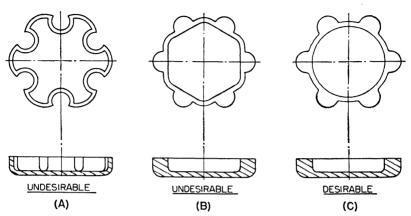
Complex contours add to die cost and make necessary more expensive cleaning tools. Since the dies for part C would be simpler and could be made with standard rotary cutters, it is the most desirable form.
